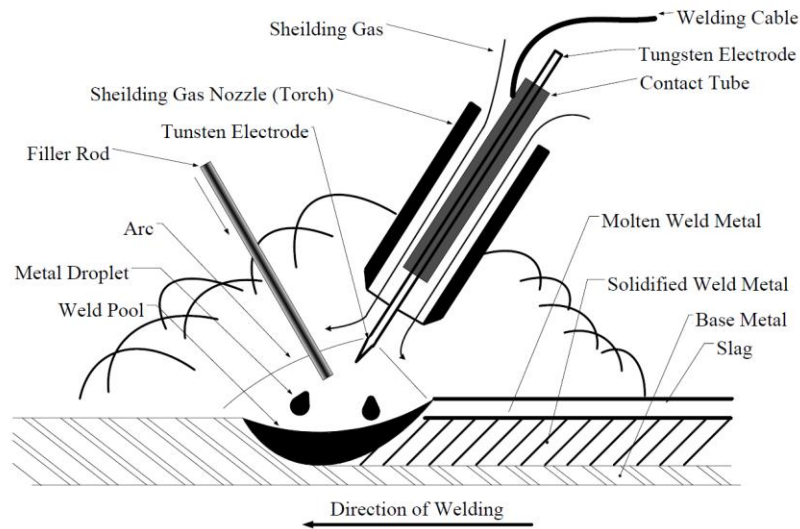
Gas Tungsten Arc Welding (GTAW) [Lee 2006]
